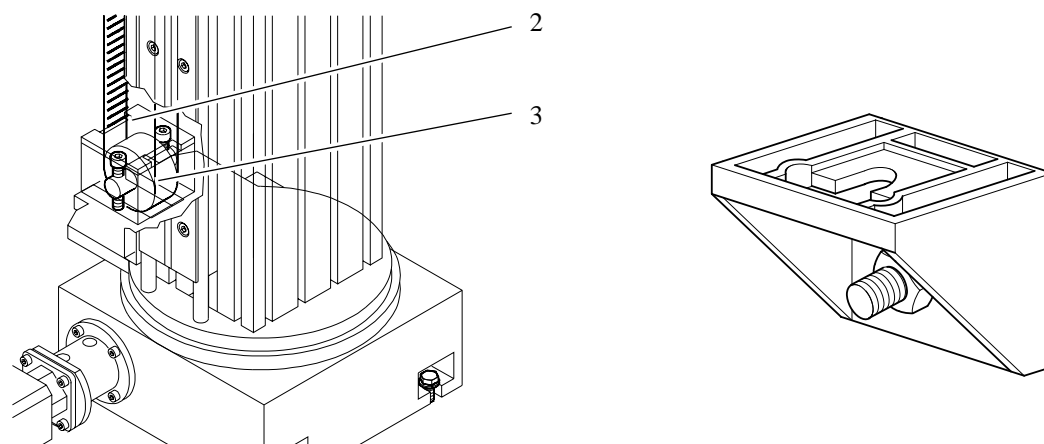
Deflection Pulley on Axis 3 and Clamping Device
